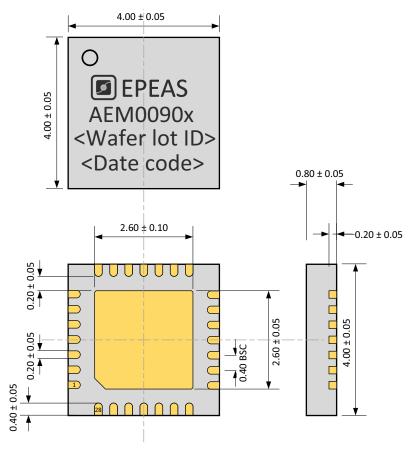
QFN28 4x4 mm drawaing (all dimensions in mm)
